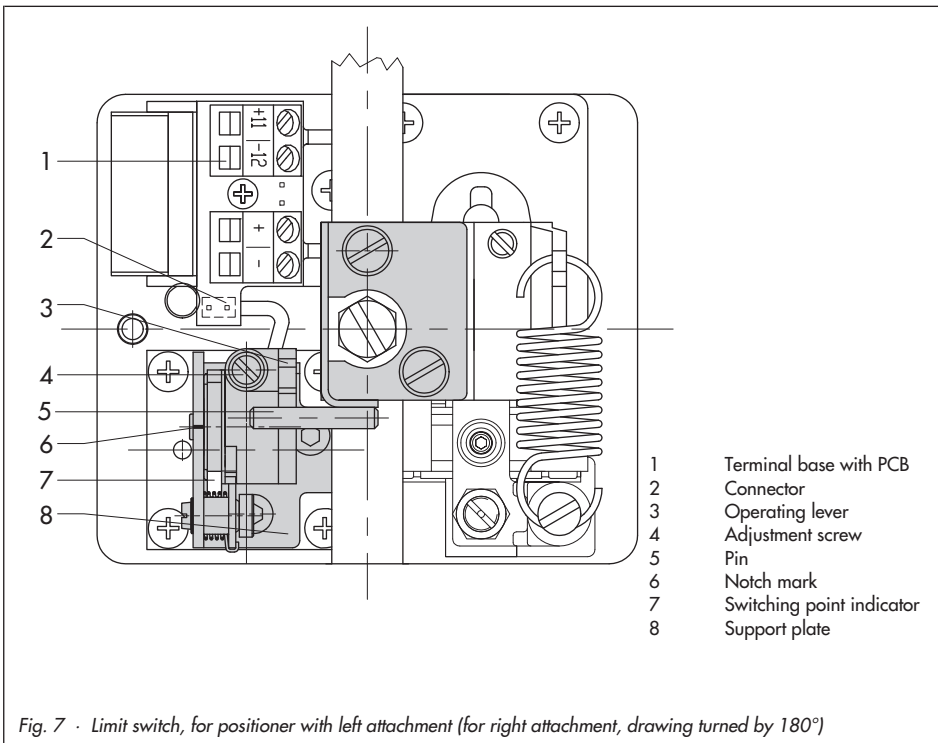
· Limit switch, for positioner with left attachment (for right attachment, drawing turned by 180°)
